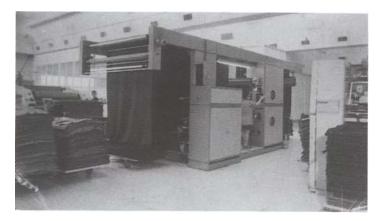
Fully automatic shearing range [Courtesy of Swiss Association of Machinery Manufacturers (VSM)].
